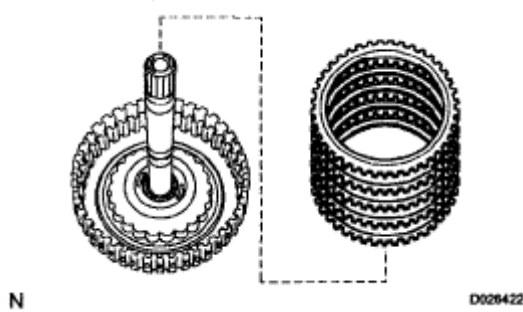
Removing Flange, Discs And Plates From Intermediate Shaft
